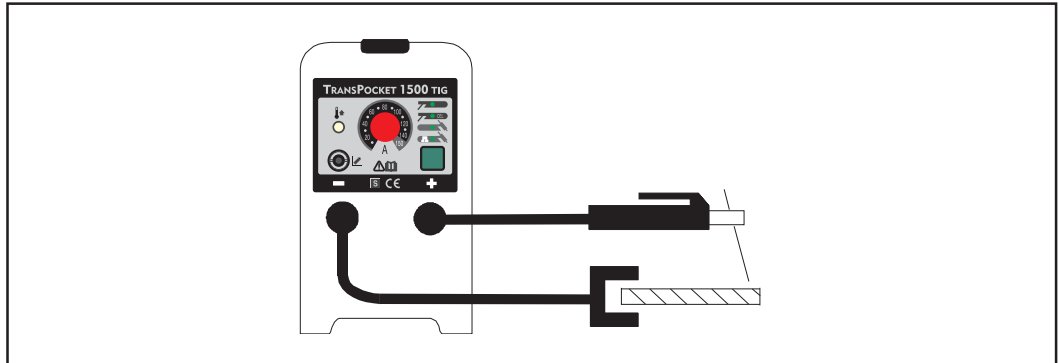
TP 1500 tooled up for rod electrode welding
